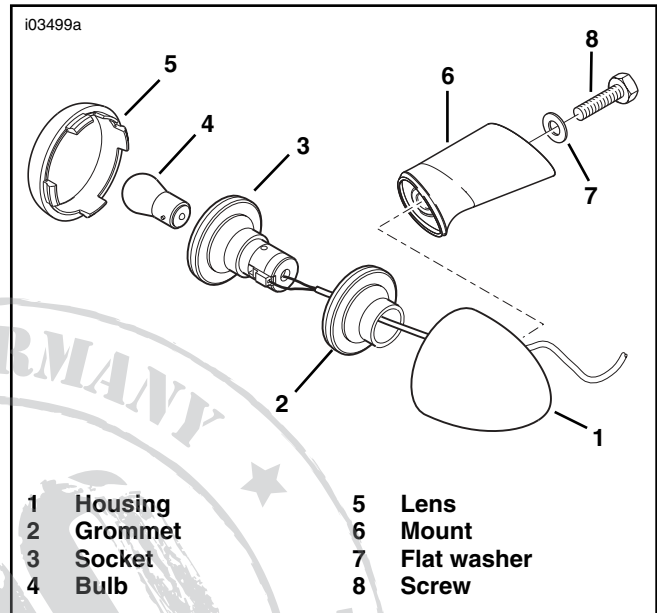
Removing the Stock Turn Signal Housing and Mounting Hardware
